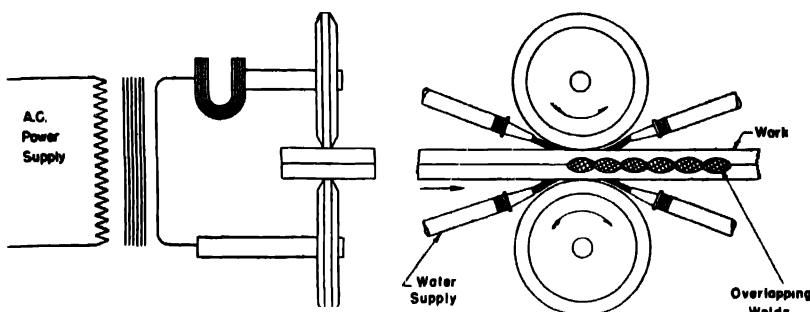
Schematic diagram of welding circuit and arrangement of wheels for seam welding.
